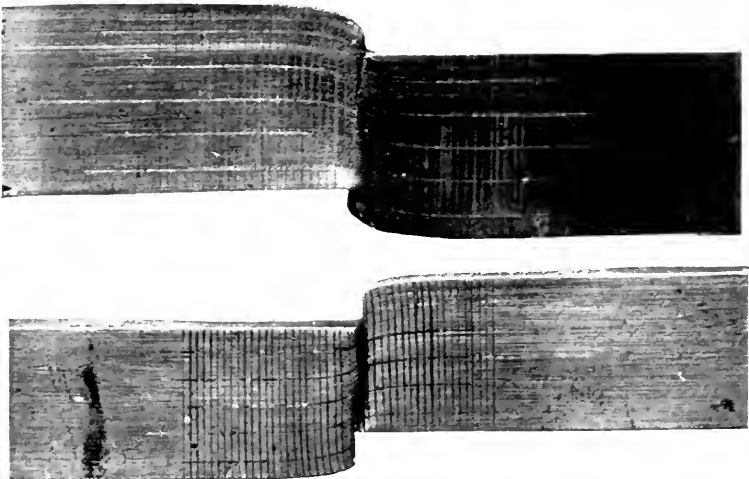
Shear Fracture of Cast Aluminium-Bronze.
